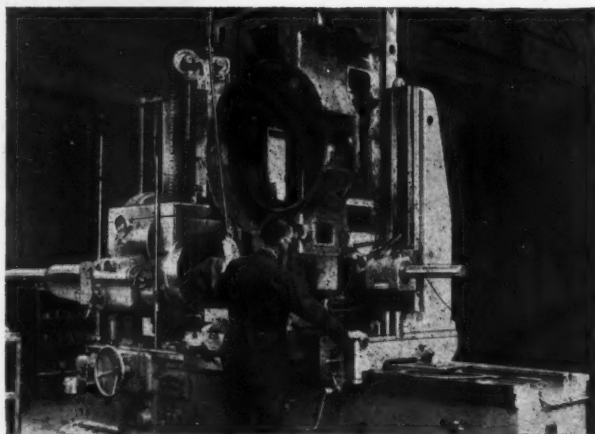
At the set-up shown, on a Kearns Optimetric boring machine provided with quick-release tool-holding arrangements, five cored holes in a cast component for a Verticalauto are machined with a bar which has three pre-set tipped tool bits. Each hole is cored to 3½ in. diameter, and is machined to a stepped form. The leading tool bit in the bar provides for rough machining right through, the second for machining to the smaller diameter of 4 in., and the third for boring the large end to 4.250 in. diameter,  $\pm 0.001$  in. The bar is run at 122 r.p.m., and is fed at a rate of 0.010 in. per rev. The radial and chordal positions of the holes must be held to  $\pm 0.0005$  in.
